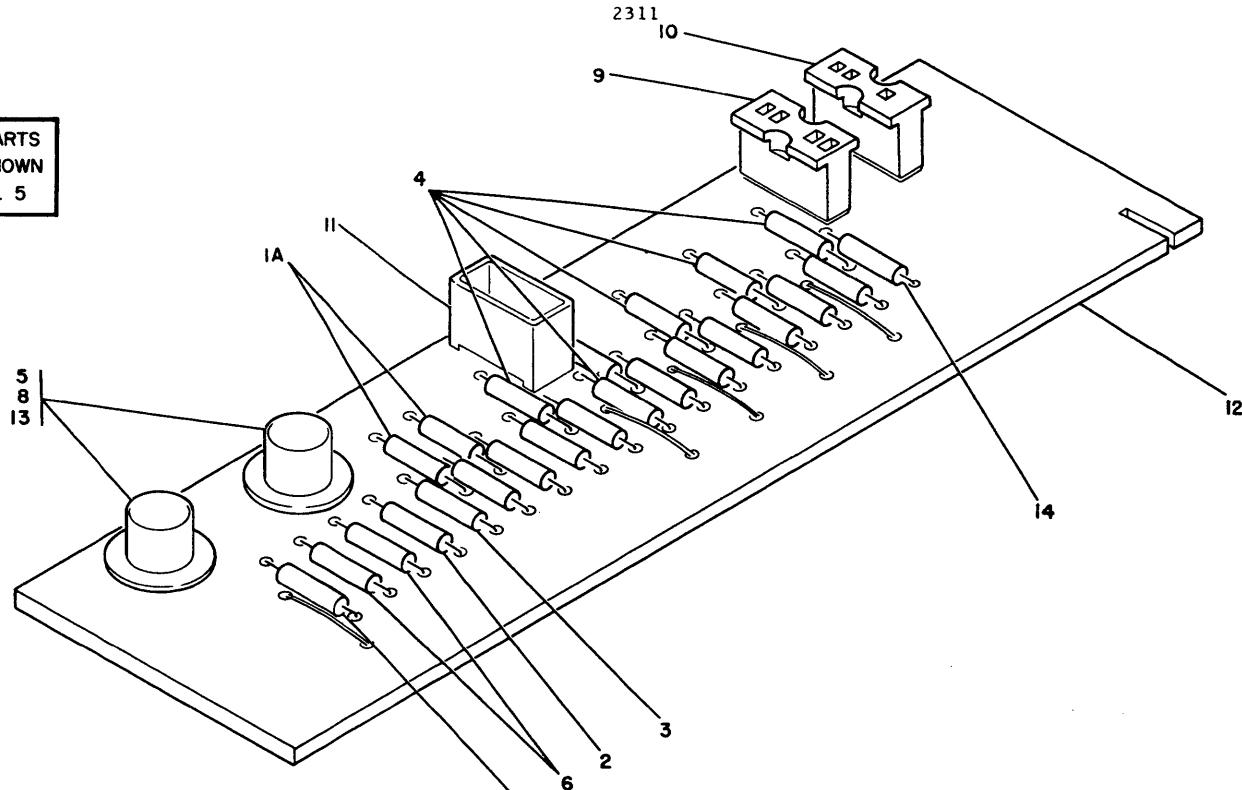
WRITE DRIVER CARD ASSEMBLY. SEE LIST 15.
